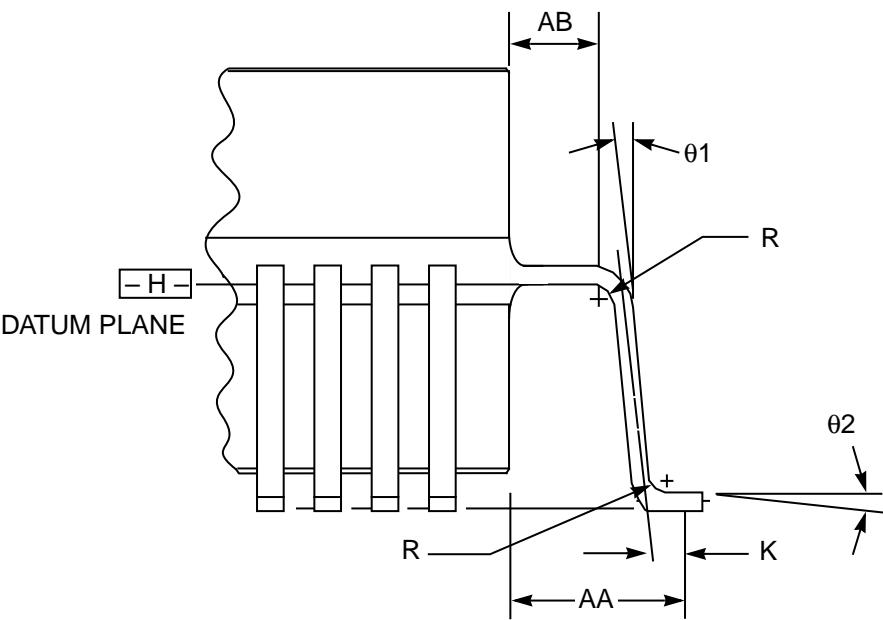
Wire-Bond CQFP Mechanical Dimensions—View AE
